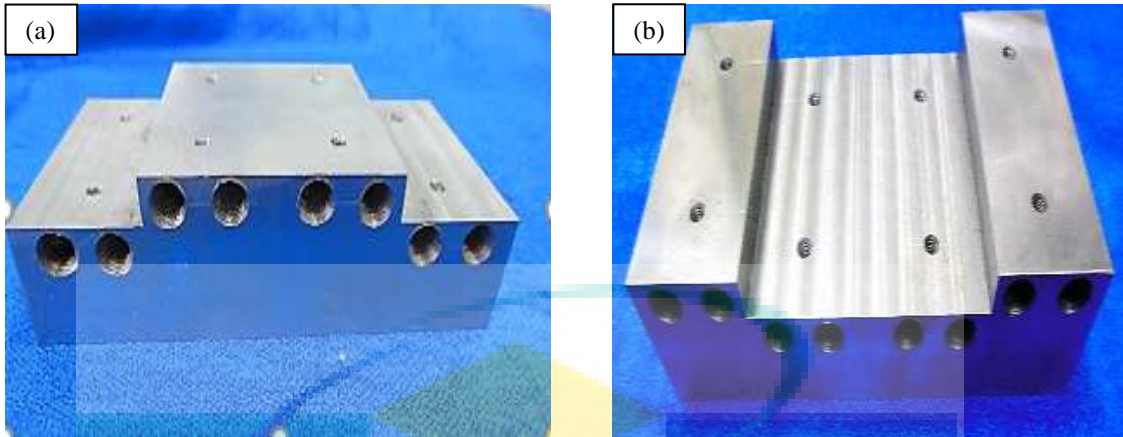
As-machined geometry of (a) upper and (b) lower die
